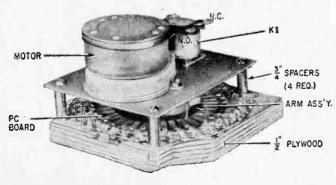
Assembled drive unit shows motor, relay K1 and lamp commutator assembly. Proper alignment is very important.
